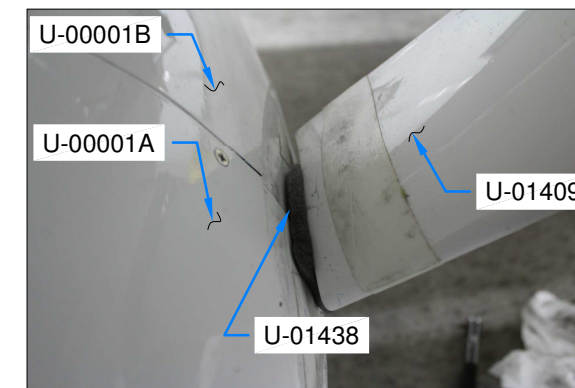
WHEEL FAIRING SEAL INSTALLED
